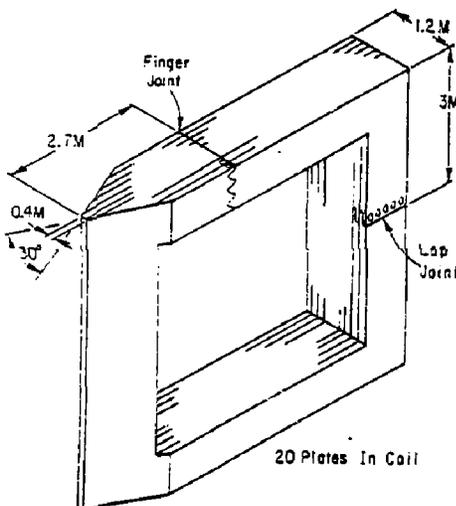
Illustrative demountable joint positions for a rectangular TF coil constructed of plates. [81-P008]
